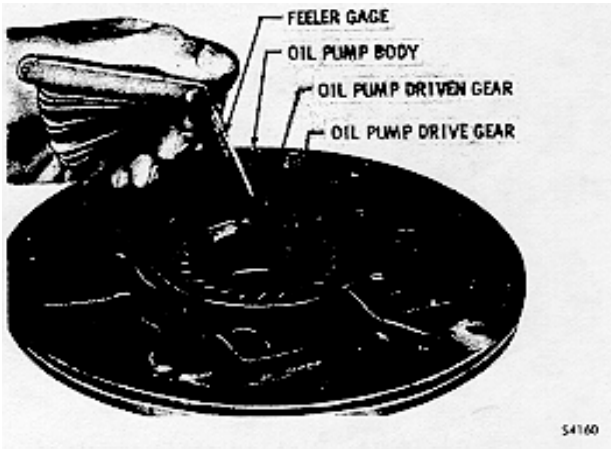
Checking diameter clearance of oil pump driven gear
